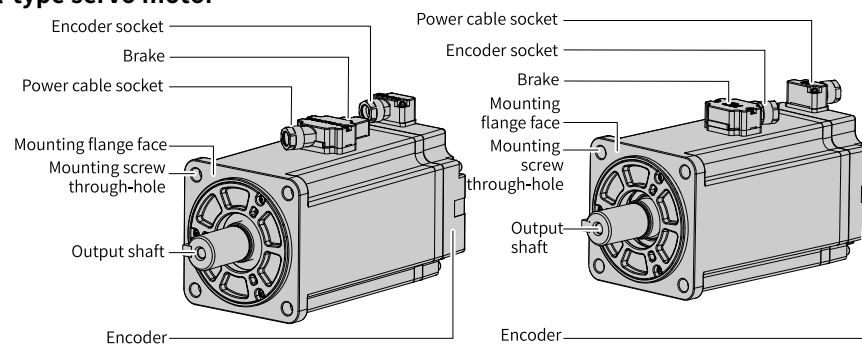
Components of terminal-type motors (Left: motor with front cable outlet; Right: motor with rear cable outlet)
